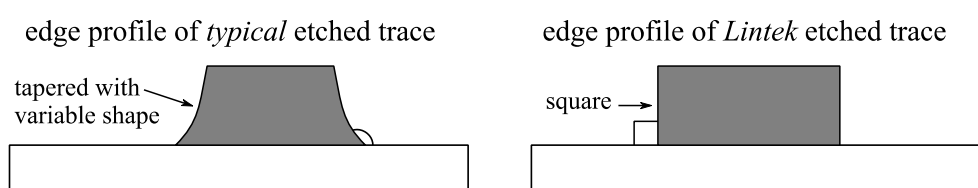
Profile of traces that can be produced when manufacturing printed circuit boards.
